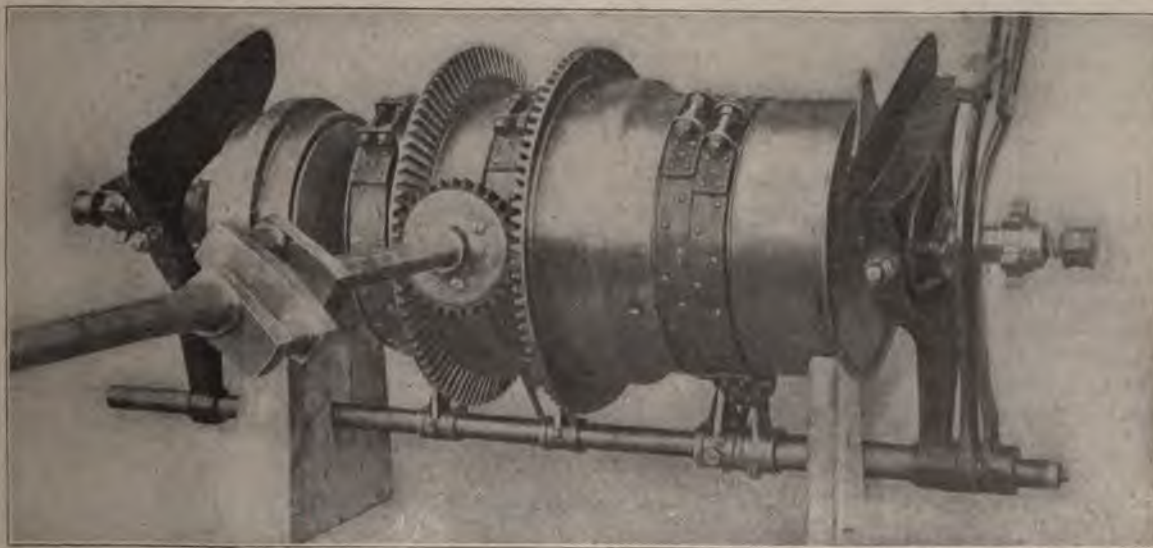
EXTERNAL VIEW OF SPEED GEAR DRUM.
